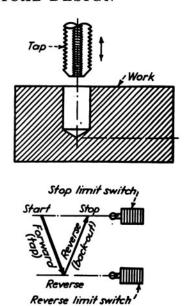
Accurate positioning of reversing and stop limits is necessary on tapping machines especially when tapping blind holes. Special alternating-current reversing motors for tapping service permit as many as 60 reversals per min. The use of two- or four-speed motors reduces the number of gear changes required. Accurate limit switches, quick-acting contactors, and high torque motors are used. A plug stop is used for braking at the "out" position.
